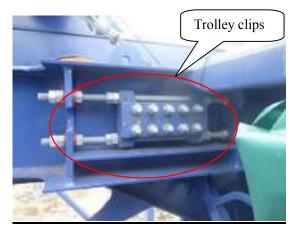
Rope Clamp with Adjustable Screw Rod
